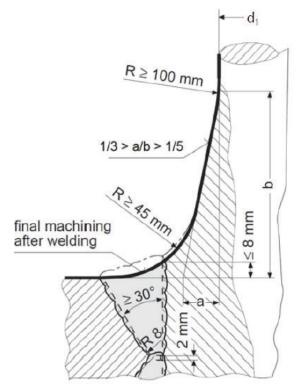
Welded joints between rudder stock and coupling flange (1/7/2016)
